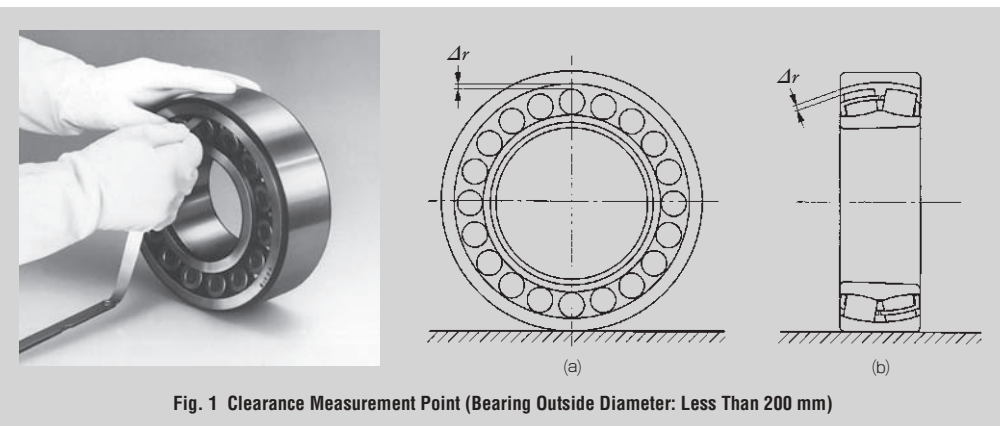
Clearance Measurement Point (Bearing Outside Diameter: Less Than 200 mm)
